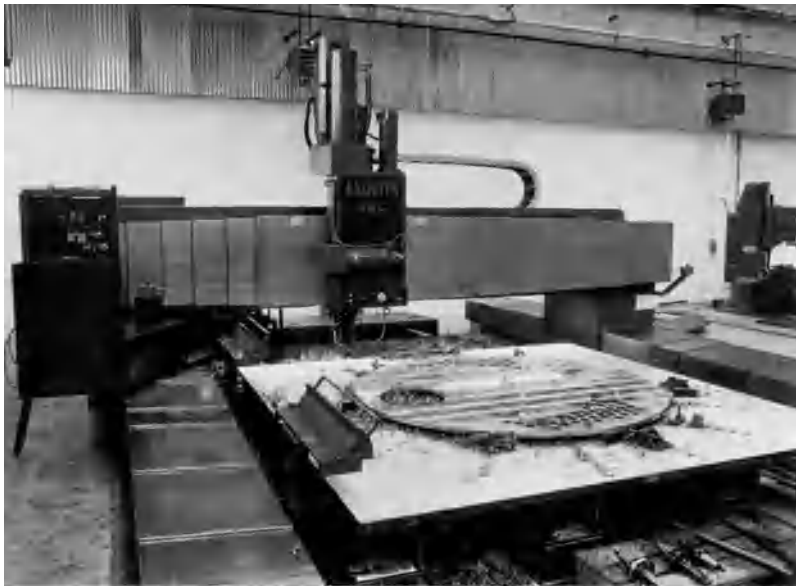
A moving gantry vertical milling machine. [Courtesy of Asquith 81.]
